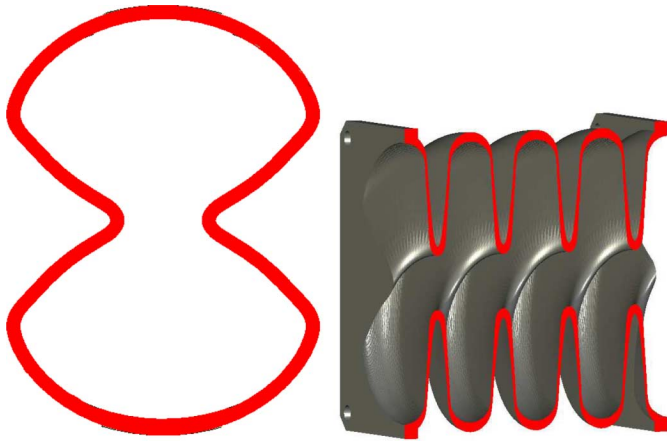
Cross section and cutaway view of the twisted elliptical prototype.
